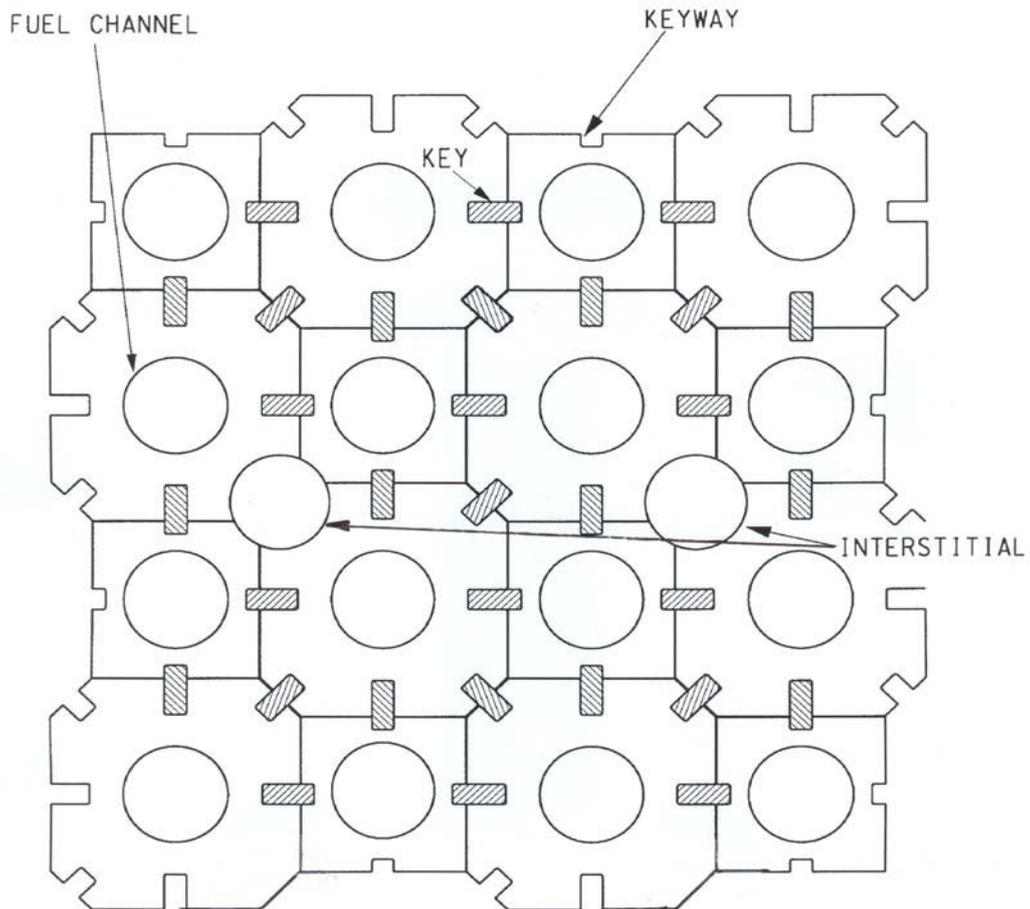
Plan Arrangement of Wylfa Graphite Bricks
